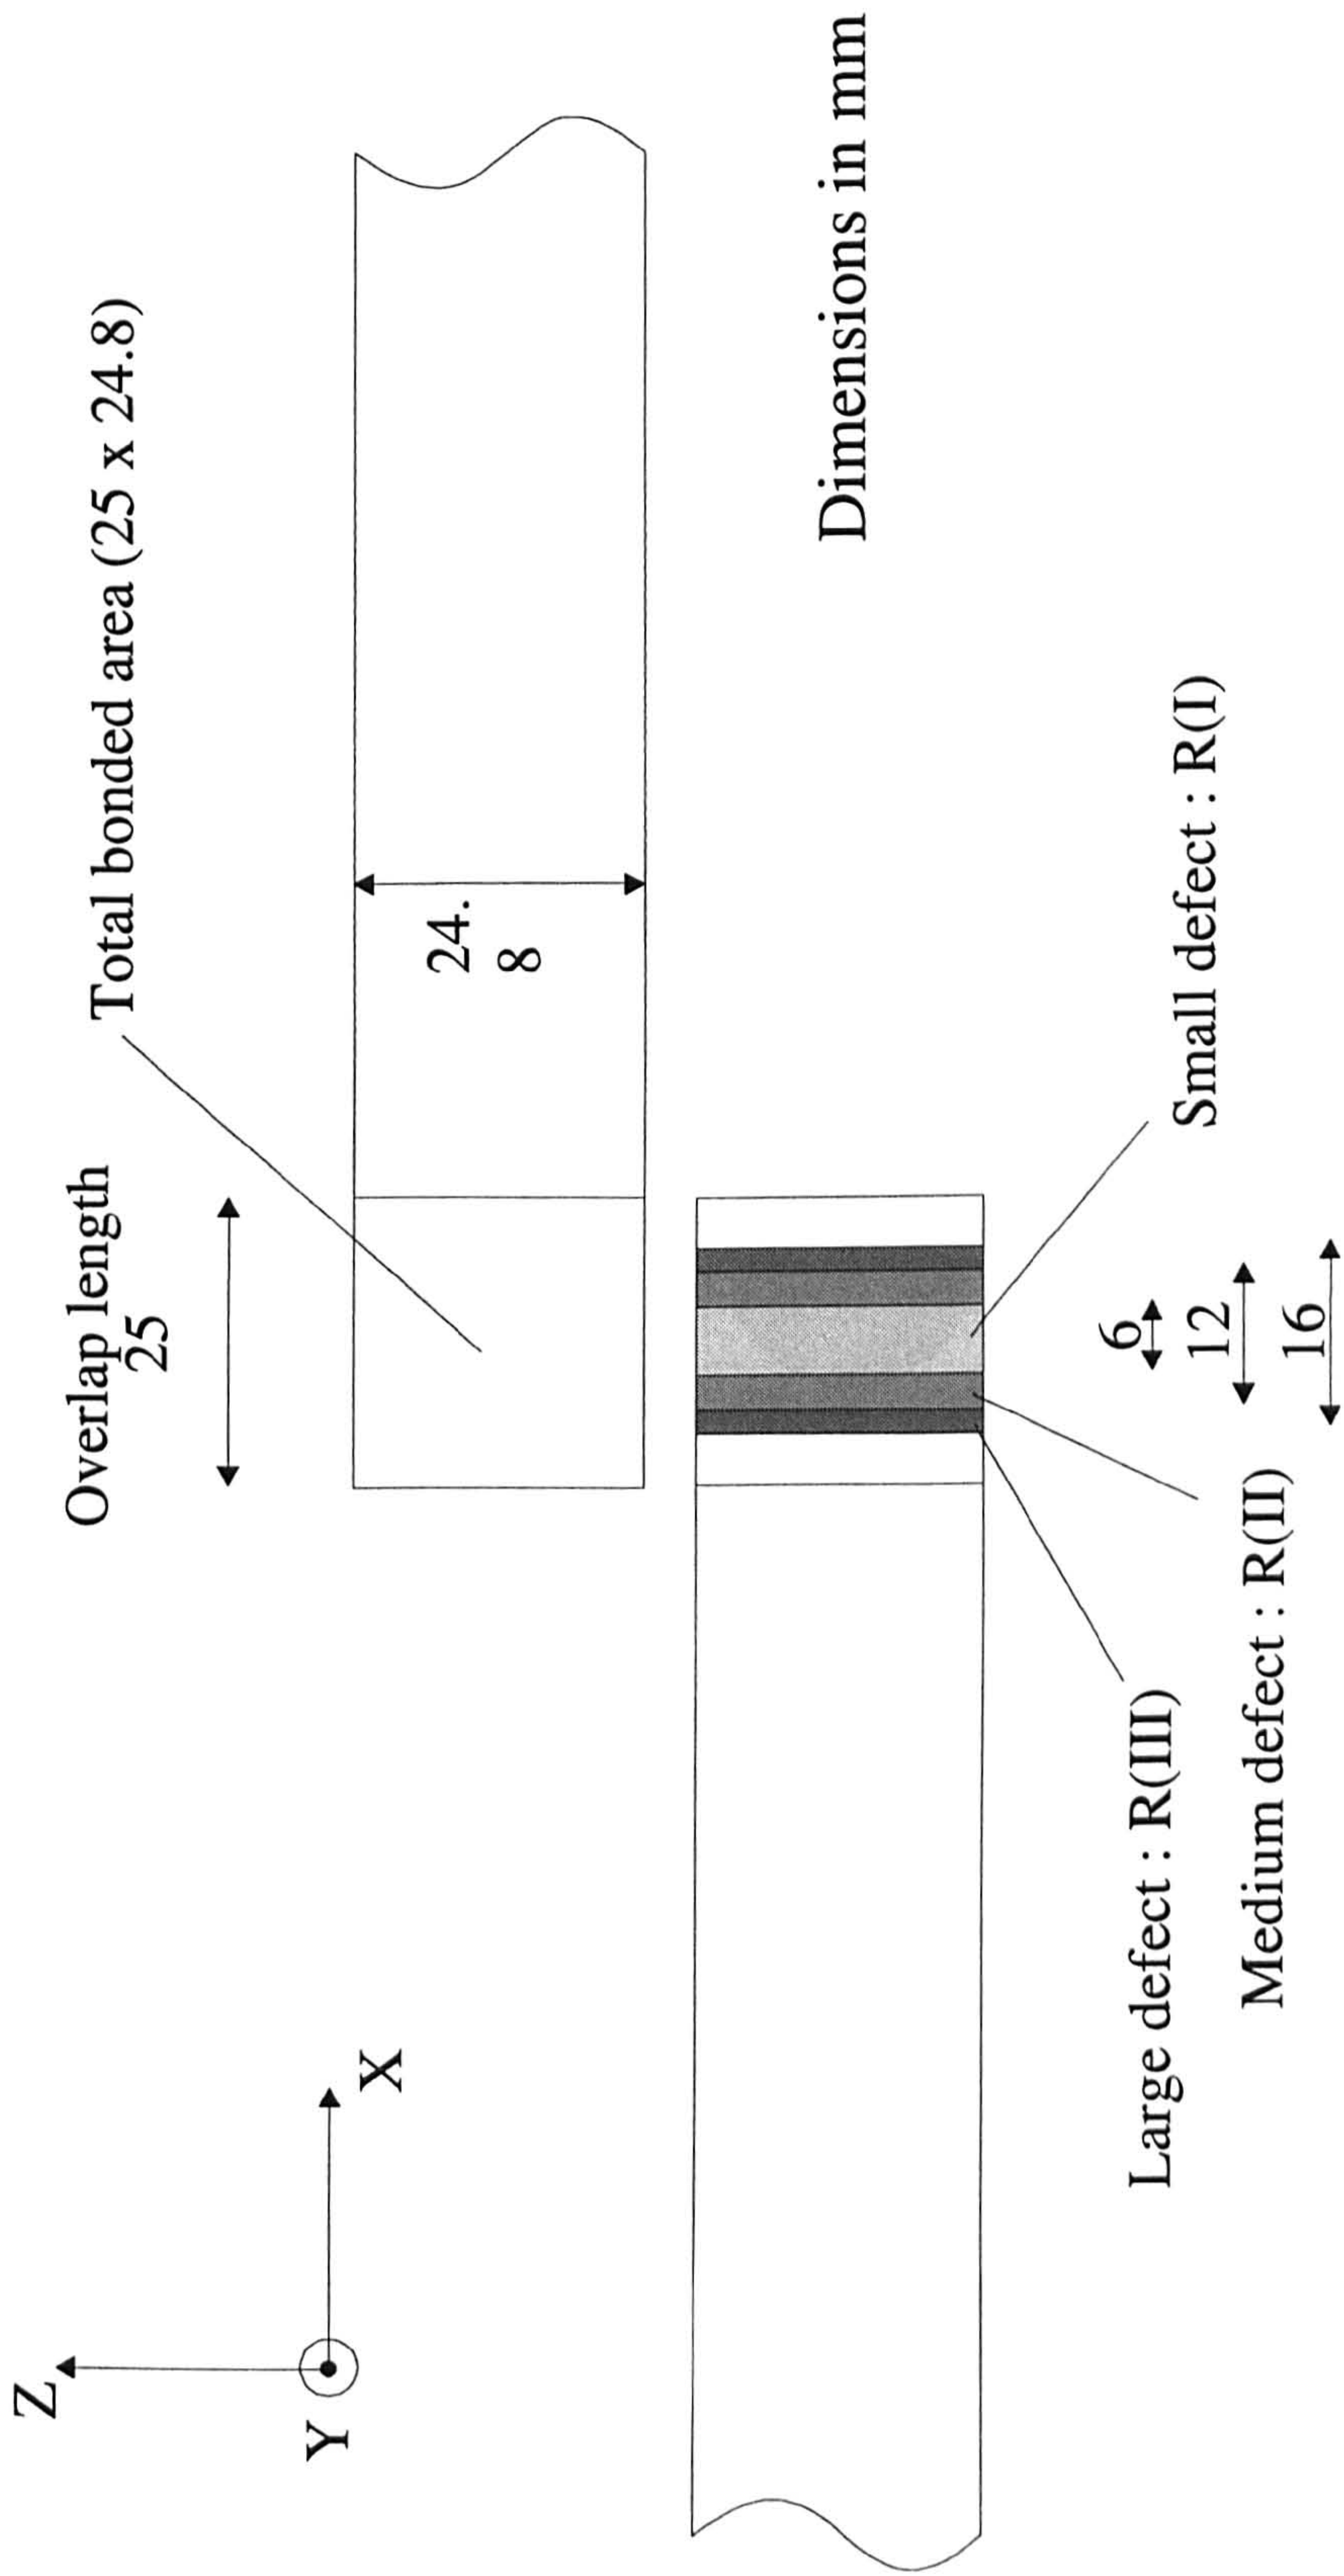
Sizes and placement of rectangular defects on single lap joints
